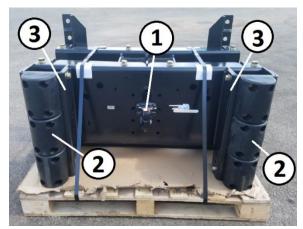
Bumper Updates Key 1 – Pintle Hitch Key 2 – Additional Bumper Key 3 – RC125046 Plate
